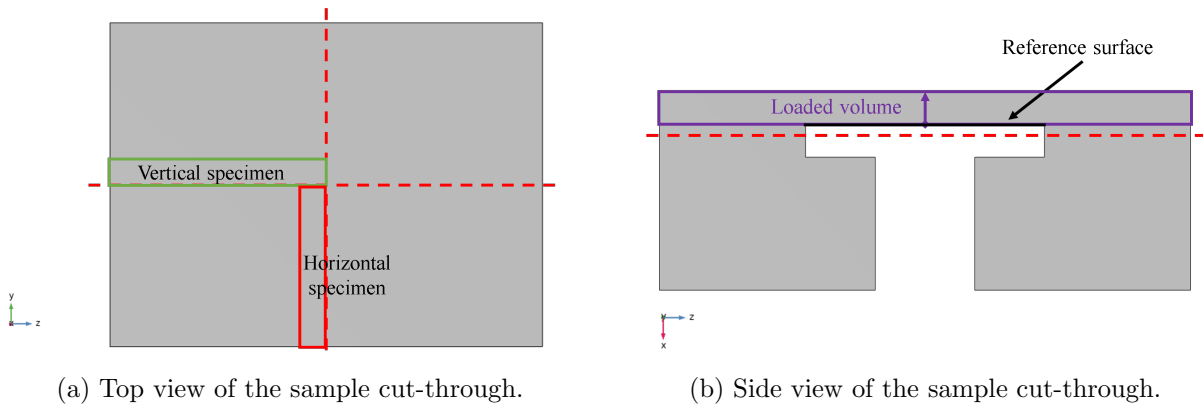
(a) Top view of the sample sectioning in four parts along the red lines, and highlights on the specimens in violet; (b) Lateral view of the sample sectioning just below the T-shape holder, whose surface is taken as reference for measuring the unmelted layer.
